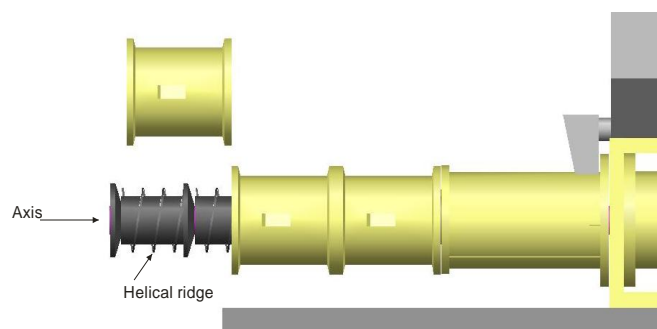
Parts of an extruder II: Screw (Ramos and Quiliano 2005)
